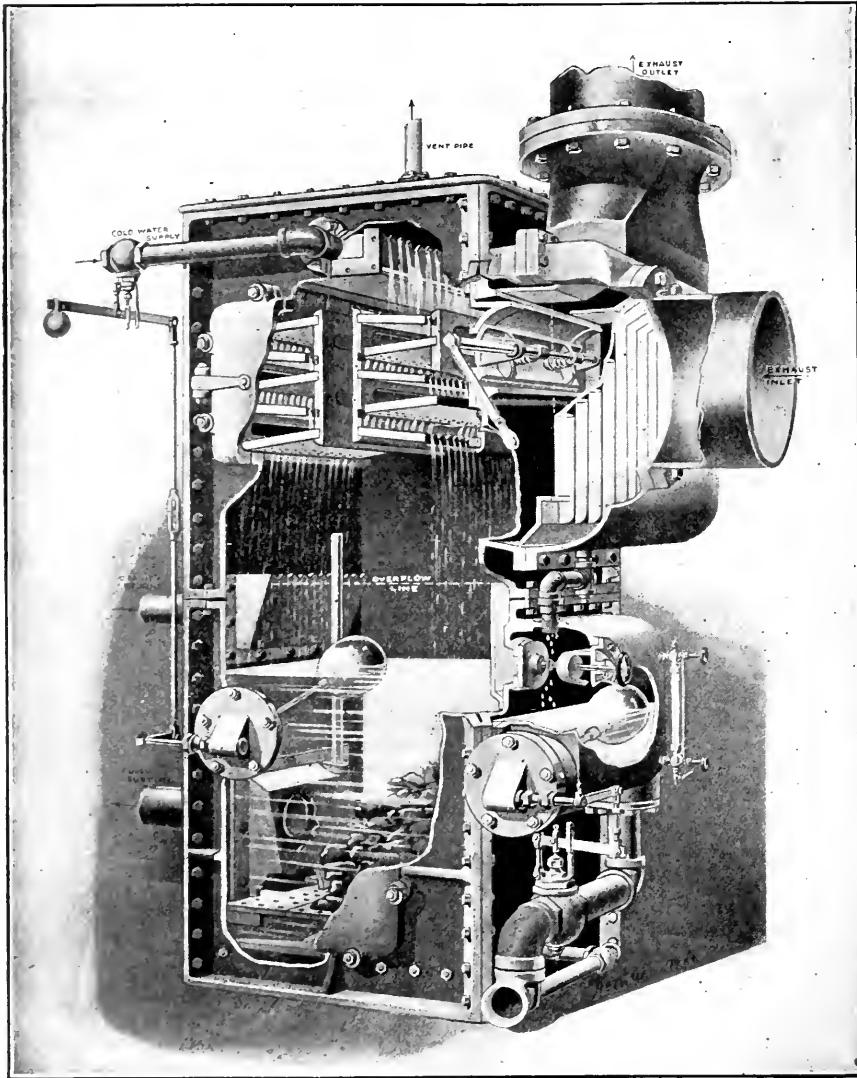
SECTIONAL VIEW OF THE HARRISON SAFETY BOILER WORKS STEAM STACK OPEN HEATER
